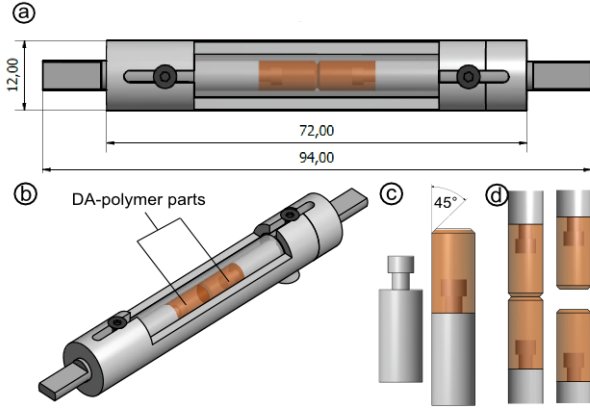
SH-MF design, dimensions are in mm: a) Top view, b) 3D view. c) -J400 SH-cylindrical part. d) SH-fuse core: healed together and fractured.
